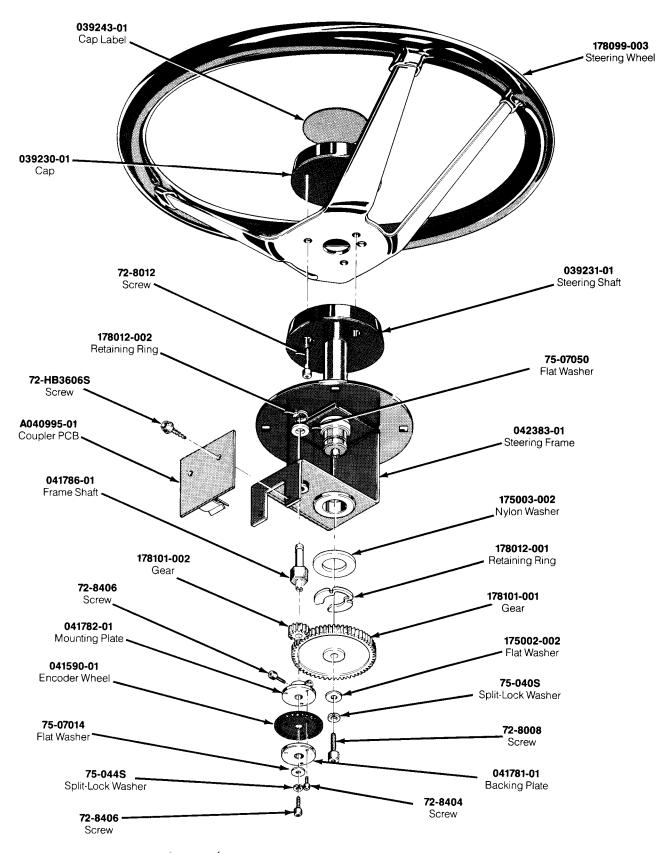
Steering-Wheel Control Assembly A041792-01 A
